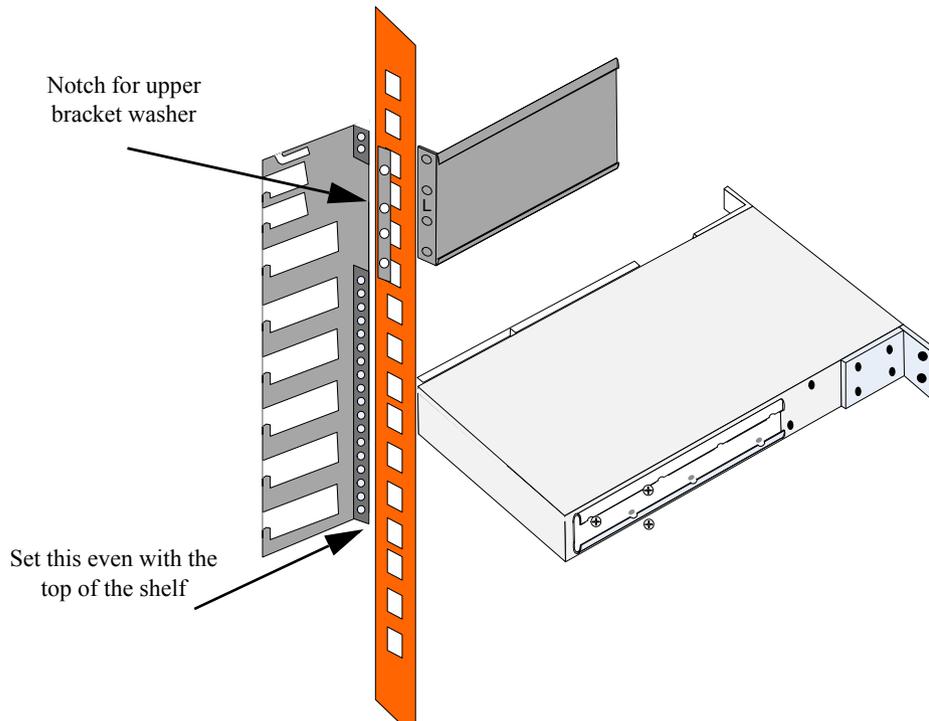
Inserting the Caged Nuts for the Cable Holder
